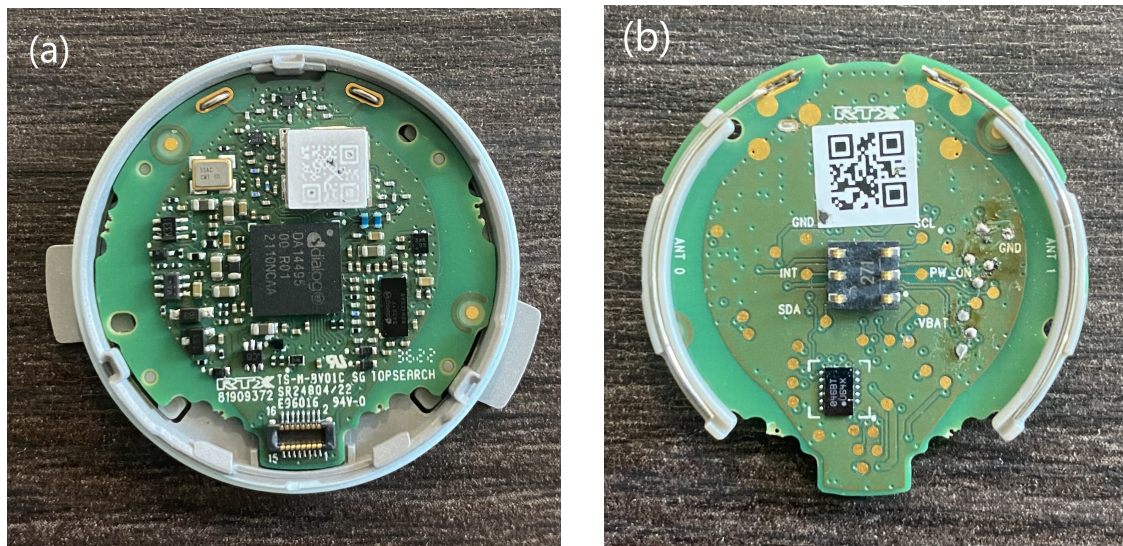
The PCB and capsule. (a) shows the front-side of the PCB being placed in the spatial constraints. The capsule closely fit to the PCB when the lid is applied to ensure no PCB-movement. (b) shows the backside of the PCB showcasing the positioning of the two antennas on the PCB. The antennas are wire antennas protruding slightly while being supported by plastic. With the protruding antennas, the capsule has indentations to fit the antennas.
